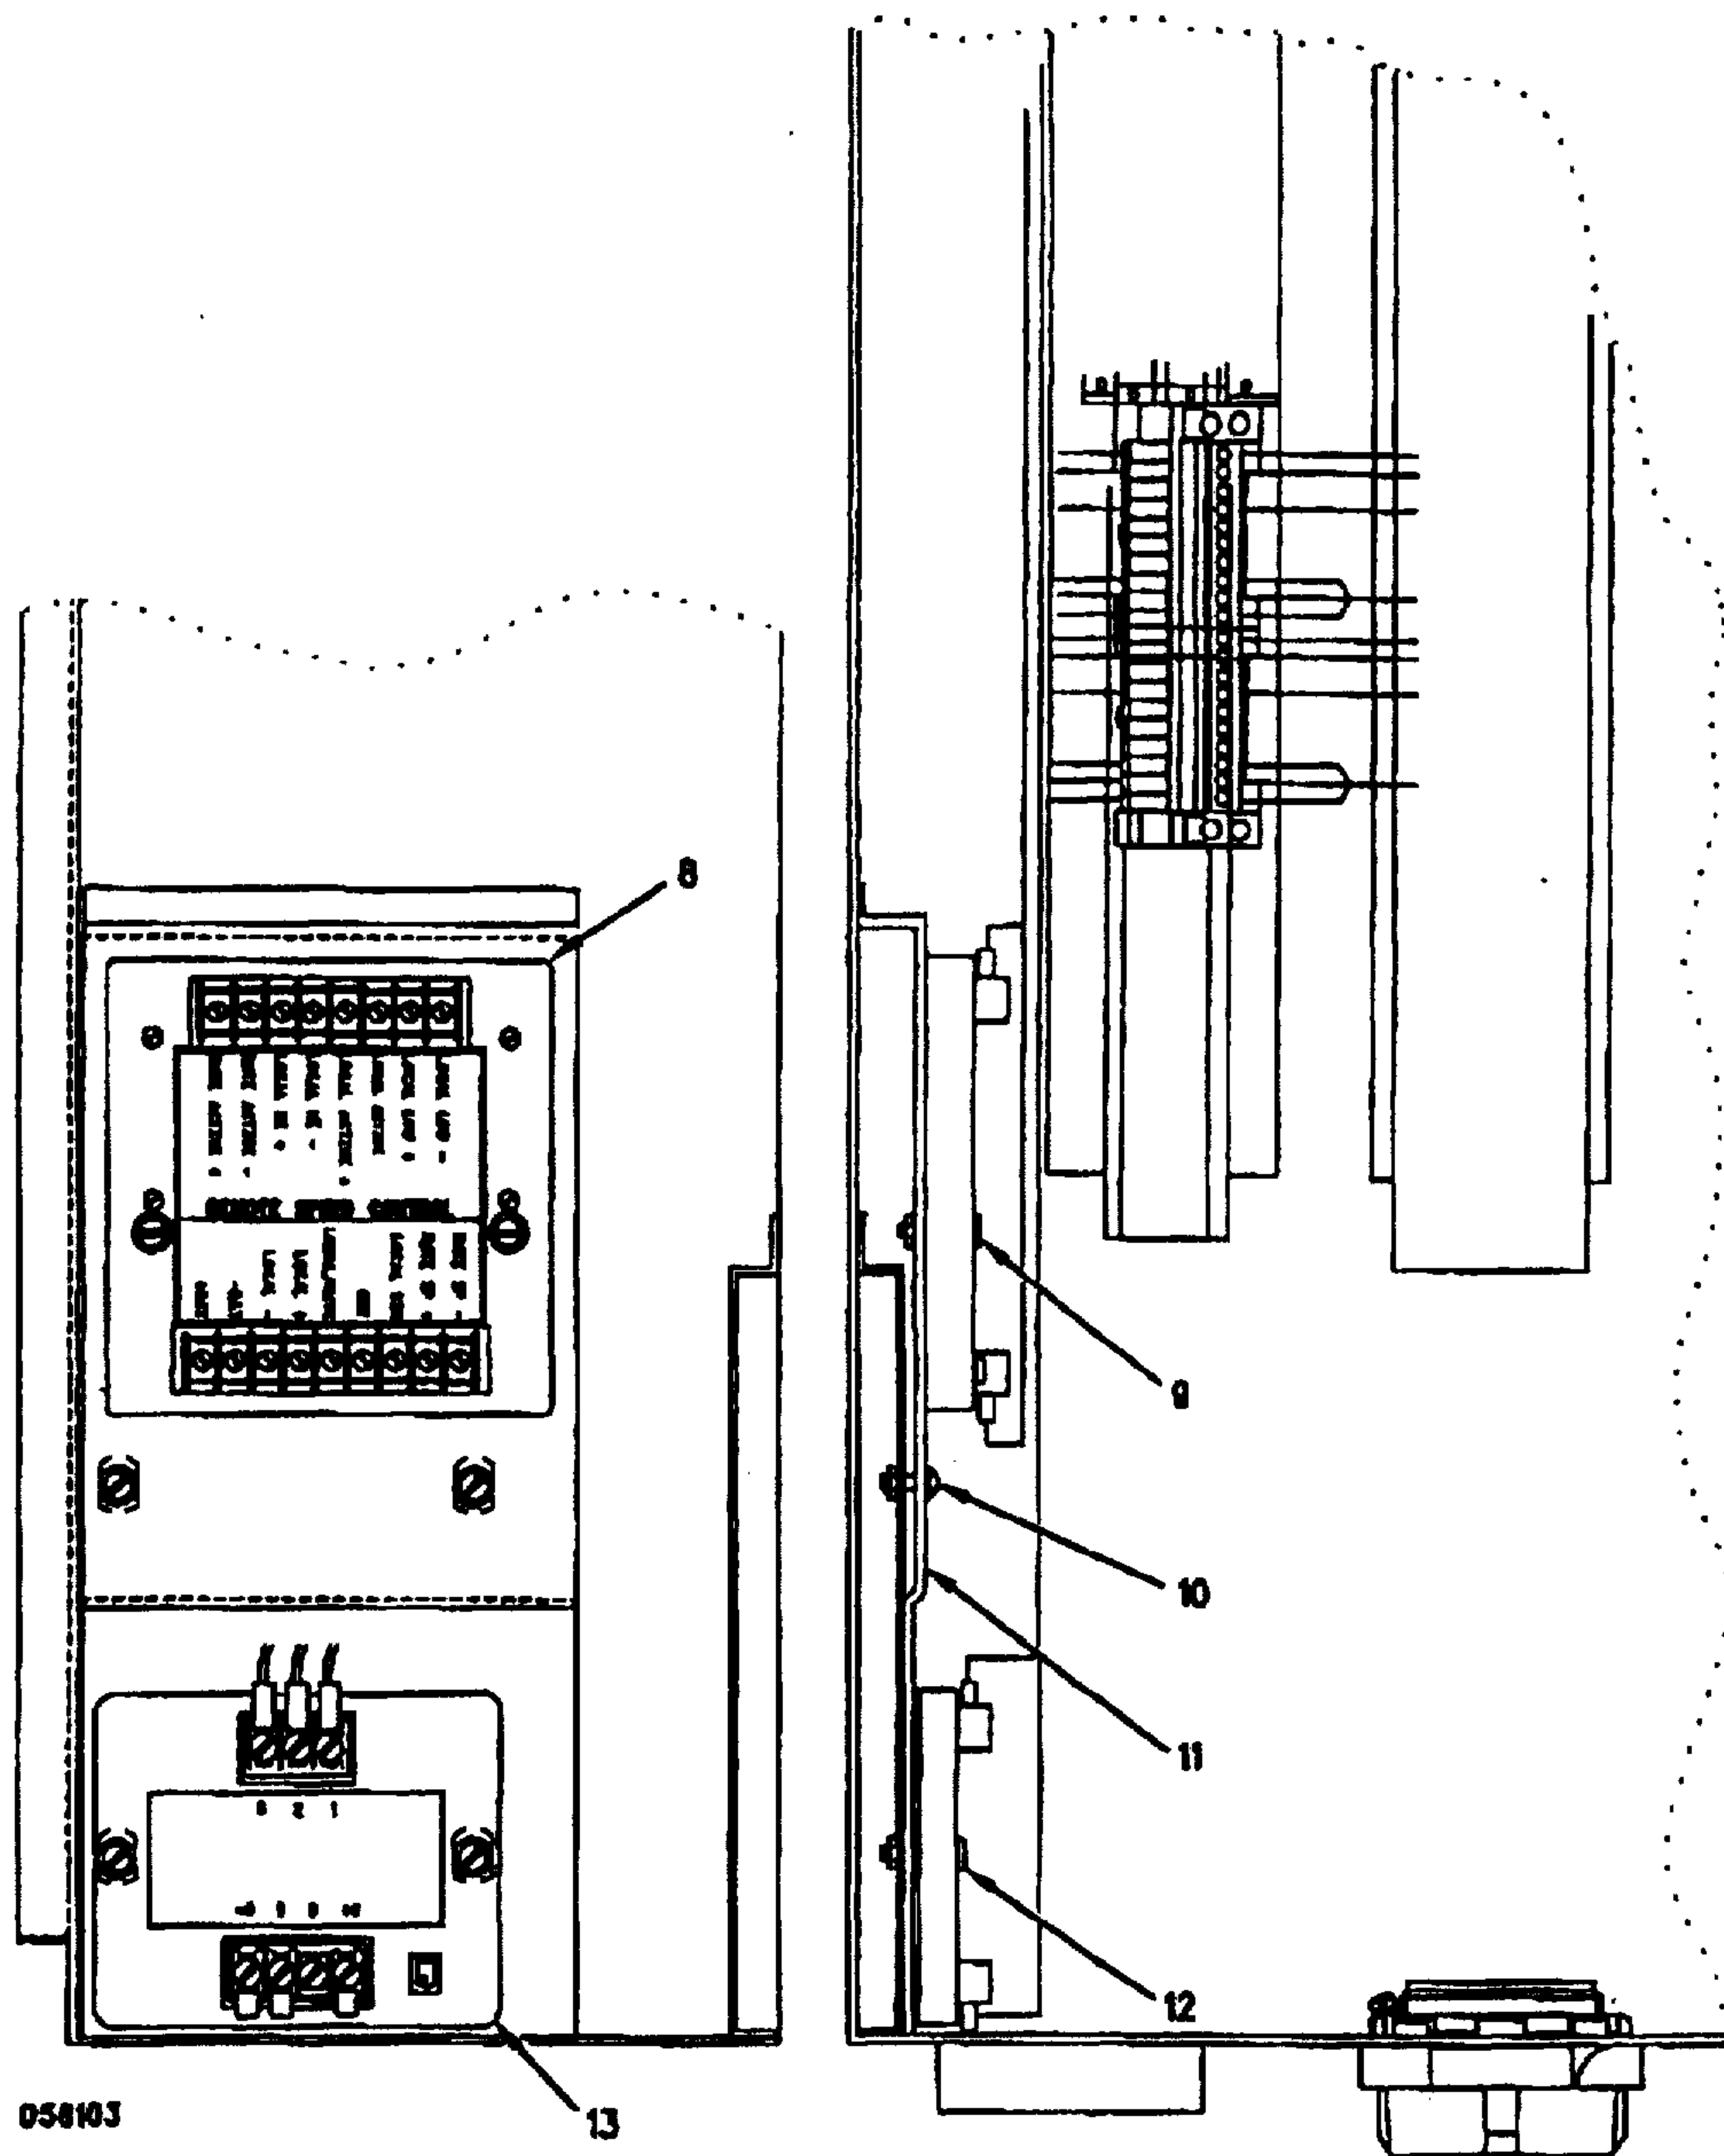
130-2706 Plate Assembly: (8) 125-5486 Control Group. (9) Existing screws. (10) 3H-3627 Machine Screw and 4B-4863 Washer. (11) 130-2706 Plate Assembly. (12) Existing screws. (13) Fuel energy content (BTU) buffer.
